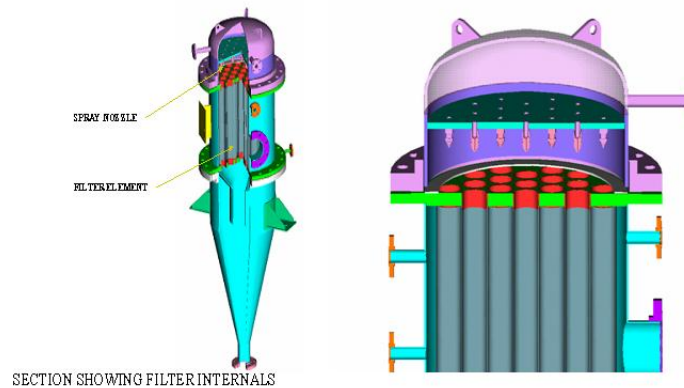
Metal Media Filter Element Installed into Custom Made Housing
